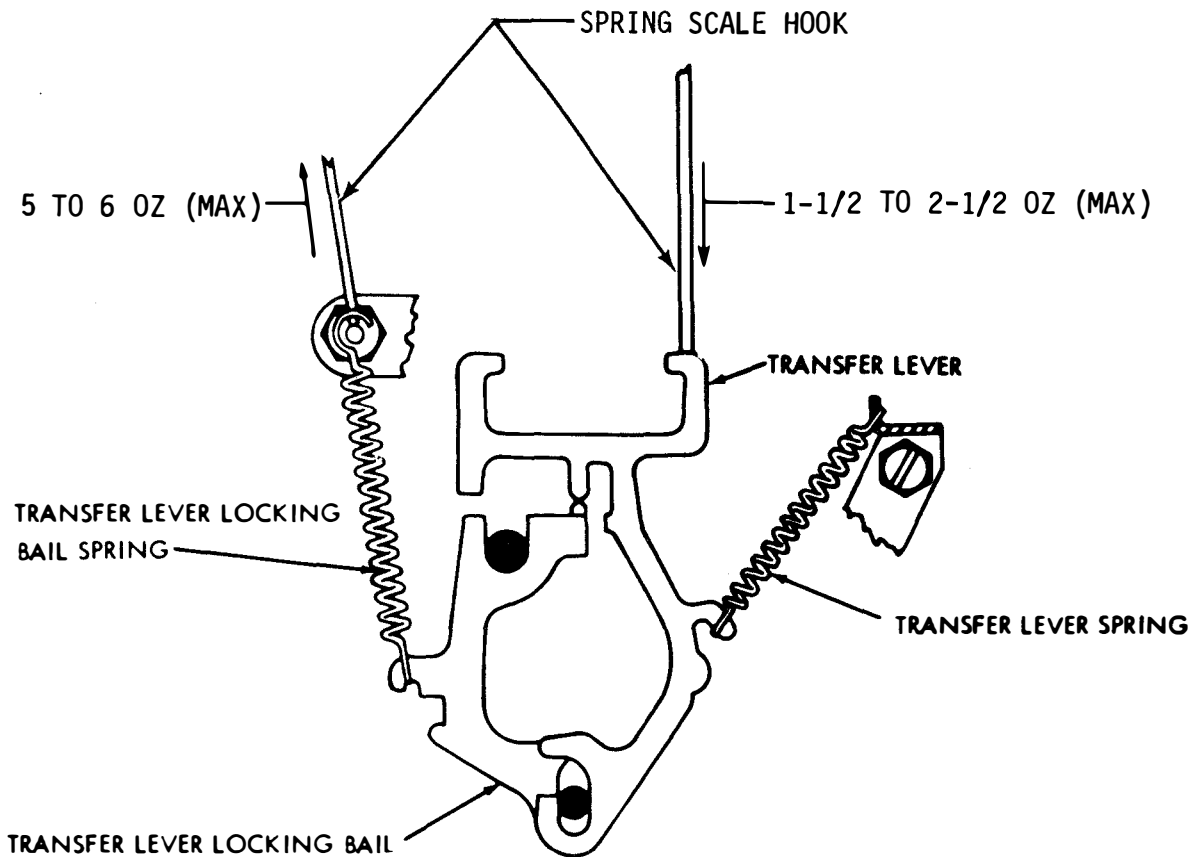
Transfer Lever Spring and Transfer Lever Locking Bail Spring
